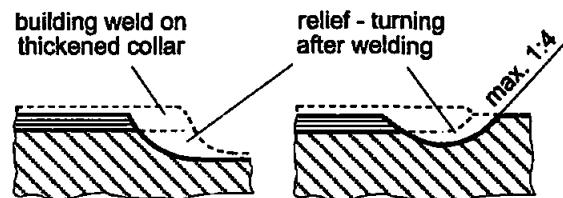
Build-up welds applied to rudderstocks and Pintles
